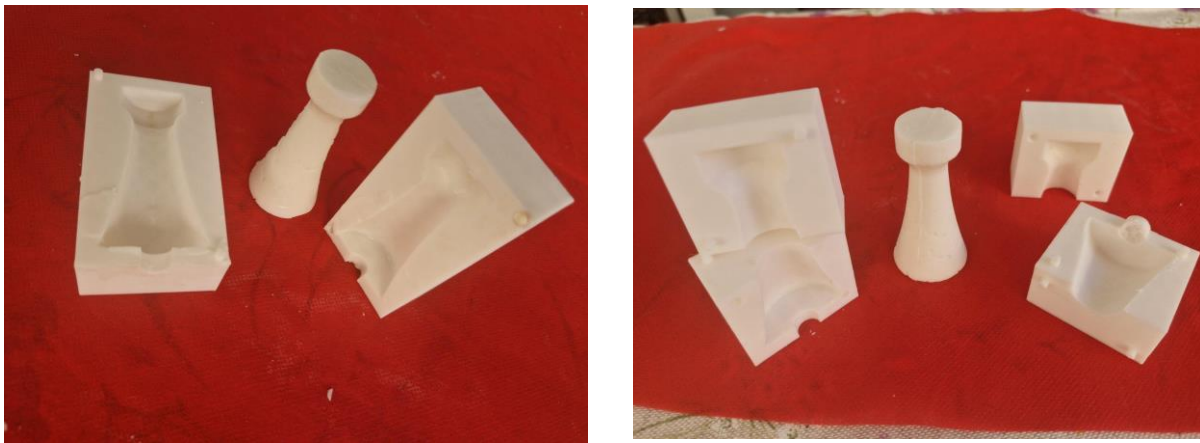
Practical validation with fabricated moulds and resultant casts. Left: bipartite mould and cast. Right: quadripartite mould and cast. The examples demonstrate that the pipeline produces assembleable mould pieces that can be used in an end-to-end casting workflow.
